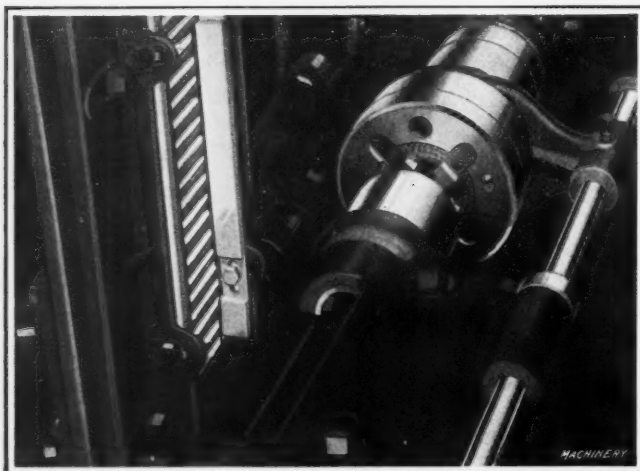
Close View of Die and Magazine Feed on Machine shown in Fig. 3
